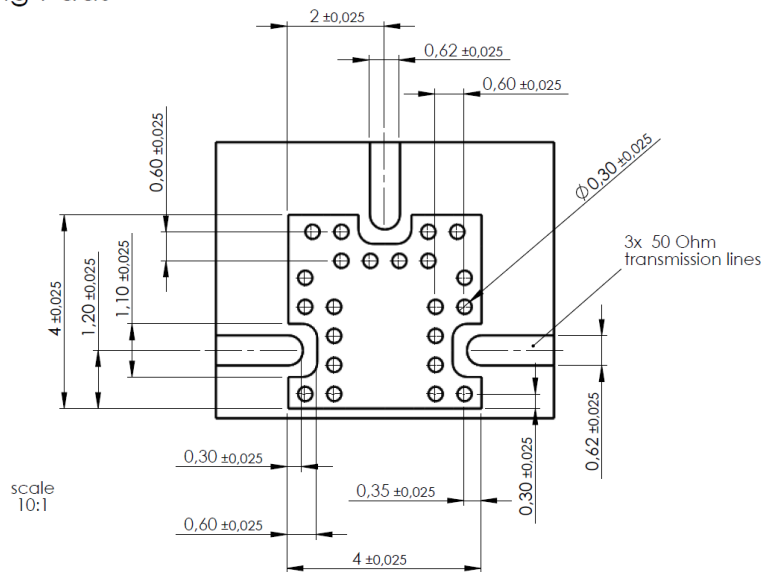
PCB conductor pattern SMD circulator Ka-Band
